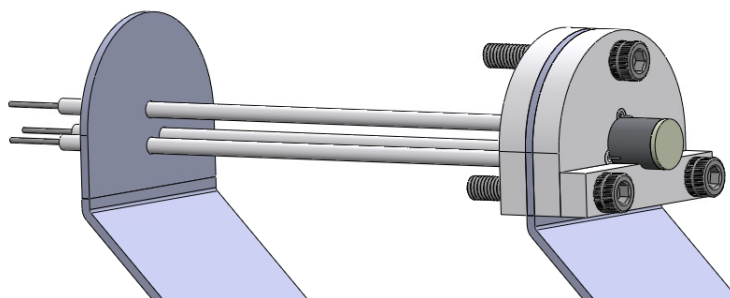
CAD model of the cathode stand with the cathode and steel tubing installed.
